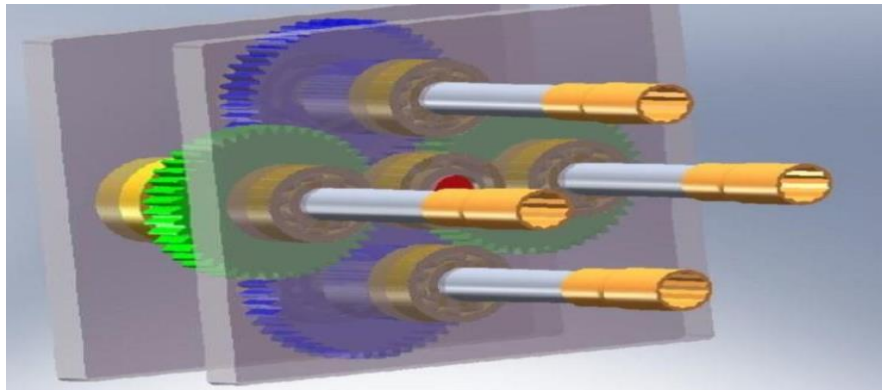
Overall Assembly of Manually Multi Nut tightened and Loose Mechanism
